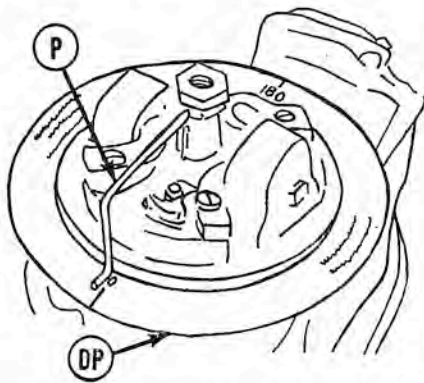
Synchronizing tool installed for adjusting the magneto points. Refer to text for details.
